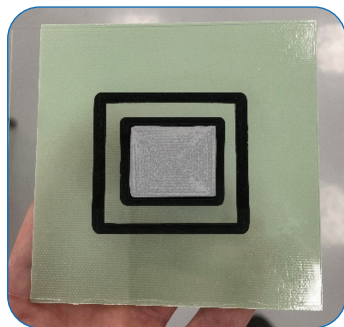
LMP-009/X dispensed in a filled rectangle pattern with our Double Barrier System.
